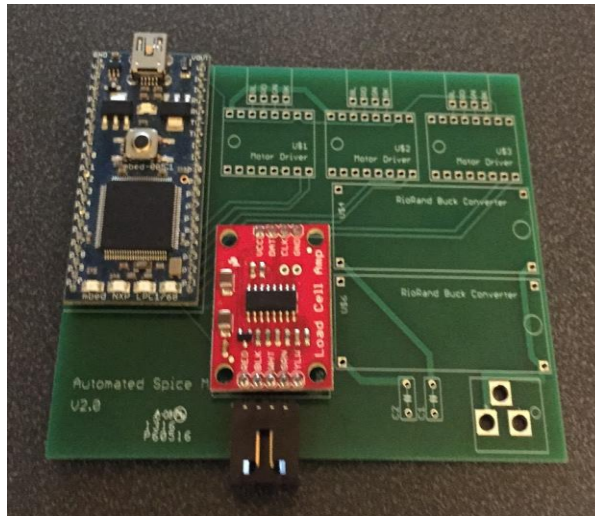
PCB board design with mBed and Load Cell Amplifier setup
